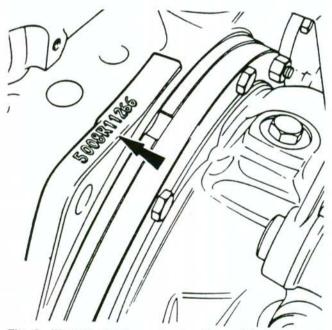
Tractor serial number is stamped into rear axle housing as shown as well as on plate shown in Fig. 1. Numbers match on original assembly.
